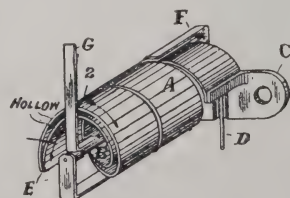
INDICATING AND COMPENSATING SPRINGS.
